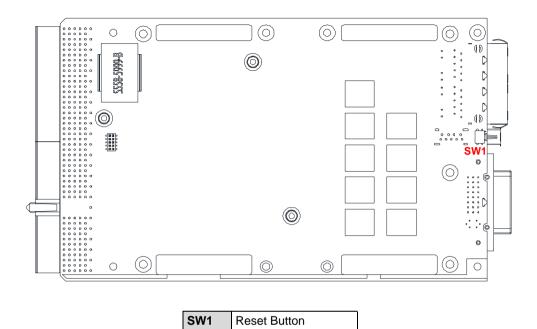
cPCI-3510 Series Board Layout (solder side)
